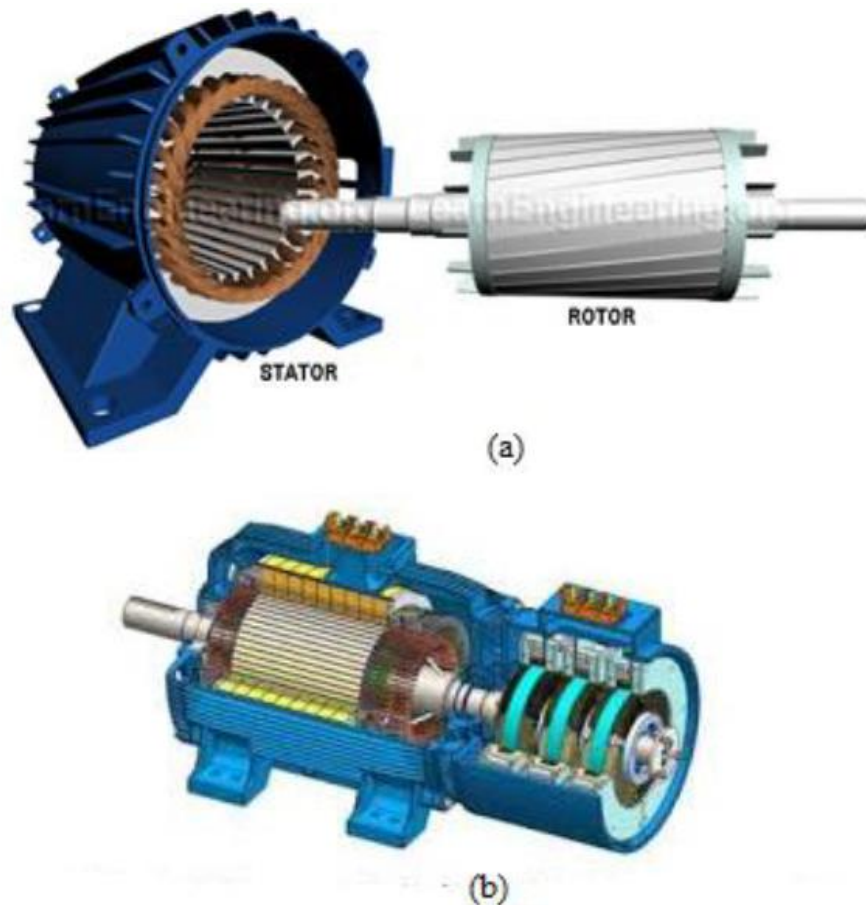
Three phase induction motor (a) squirrel cage rotor (b) slip ring rotor.
